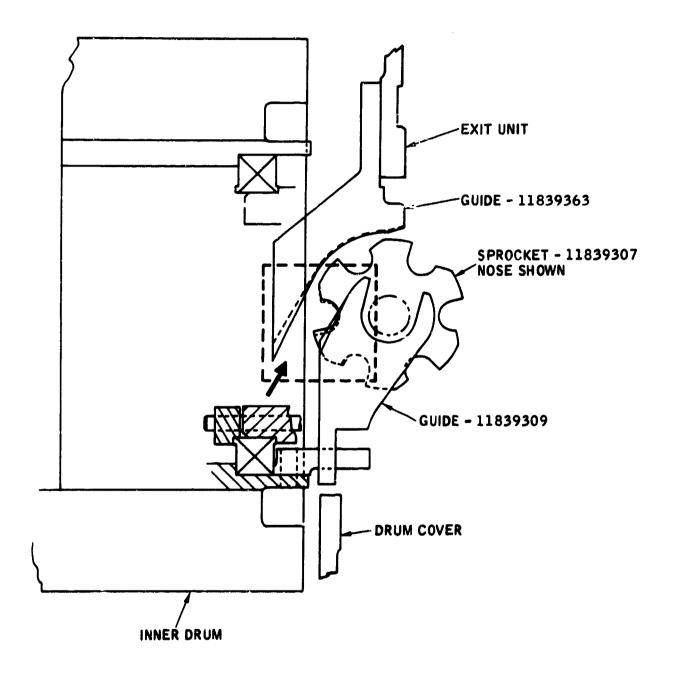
(Sheet 2 of 2) Design Study of Inner Drum to Exit Sprocket Handoff
